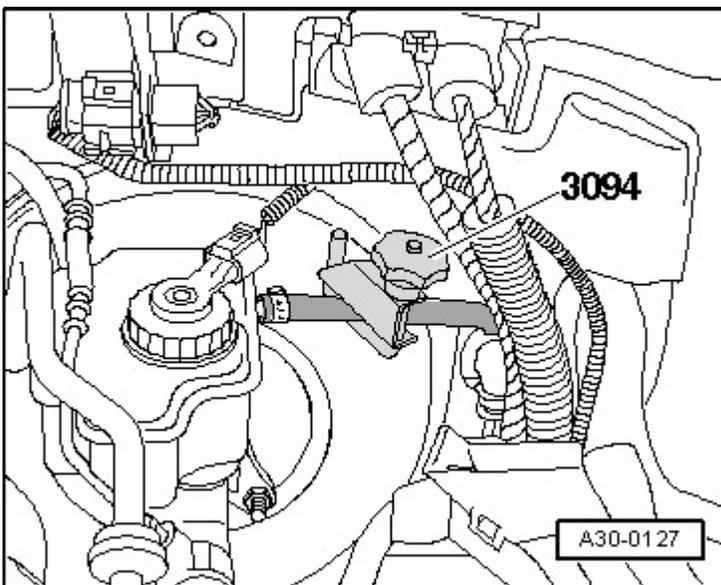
Identifying Hose Clamps 3094, Clamp Supply Hose And Master Cylinder
